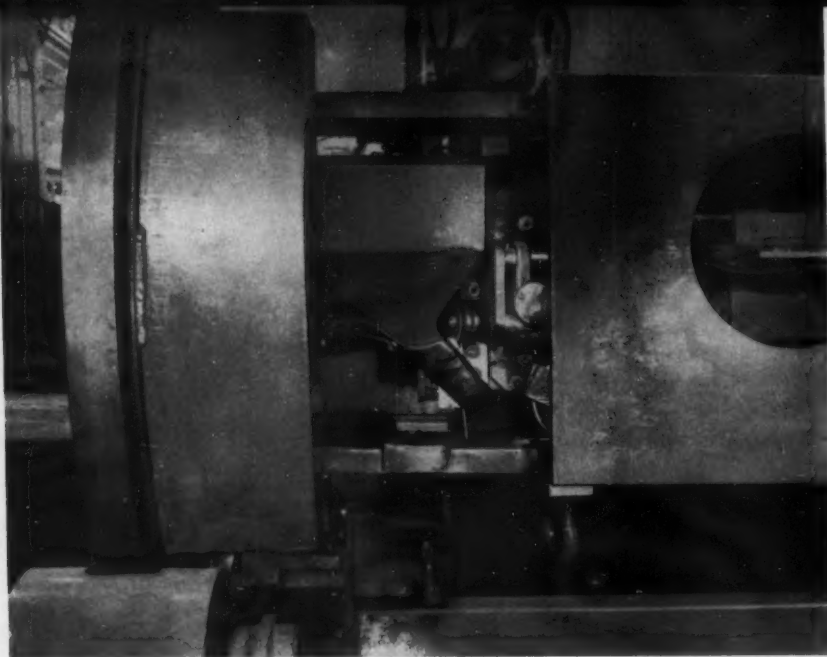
(Left) Portion of the fixture and boom head employed to make internal longitudinal welds in the box girders. Head is stationary, work and fixture are traversed.
